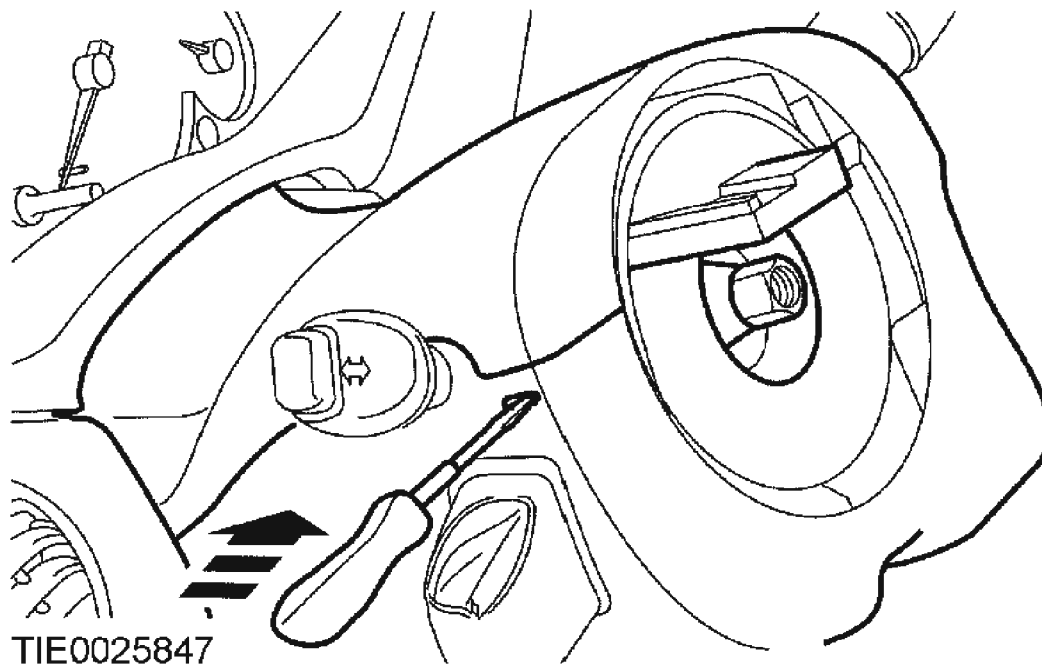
Detaching Steering Column Upper Shroud From Steering Column Lower Shroud
